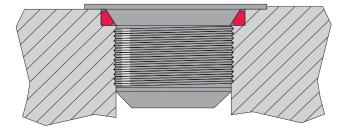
, O-rings for Straight Thread Tube Fitting Bosses
